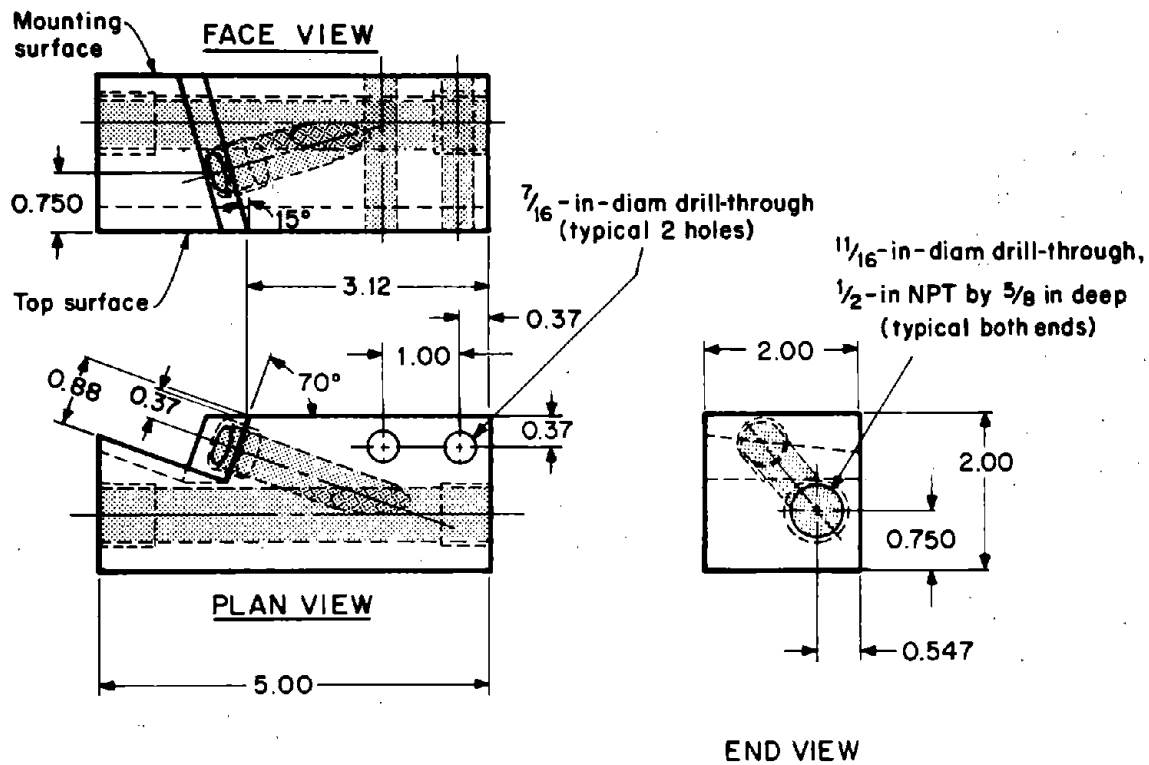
Water spray manifold 1. All dimensions are in inches.
